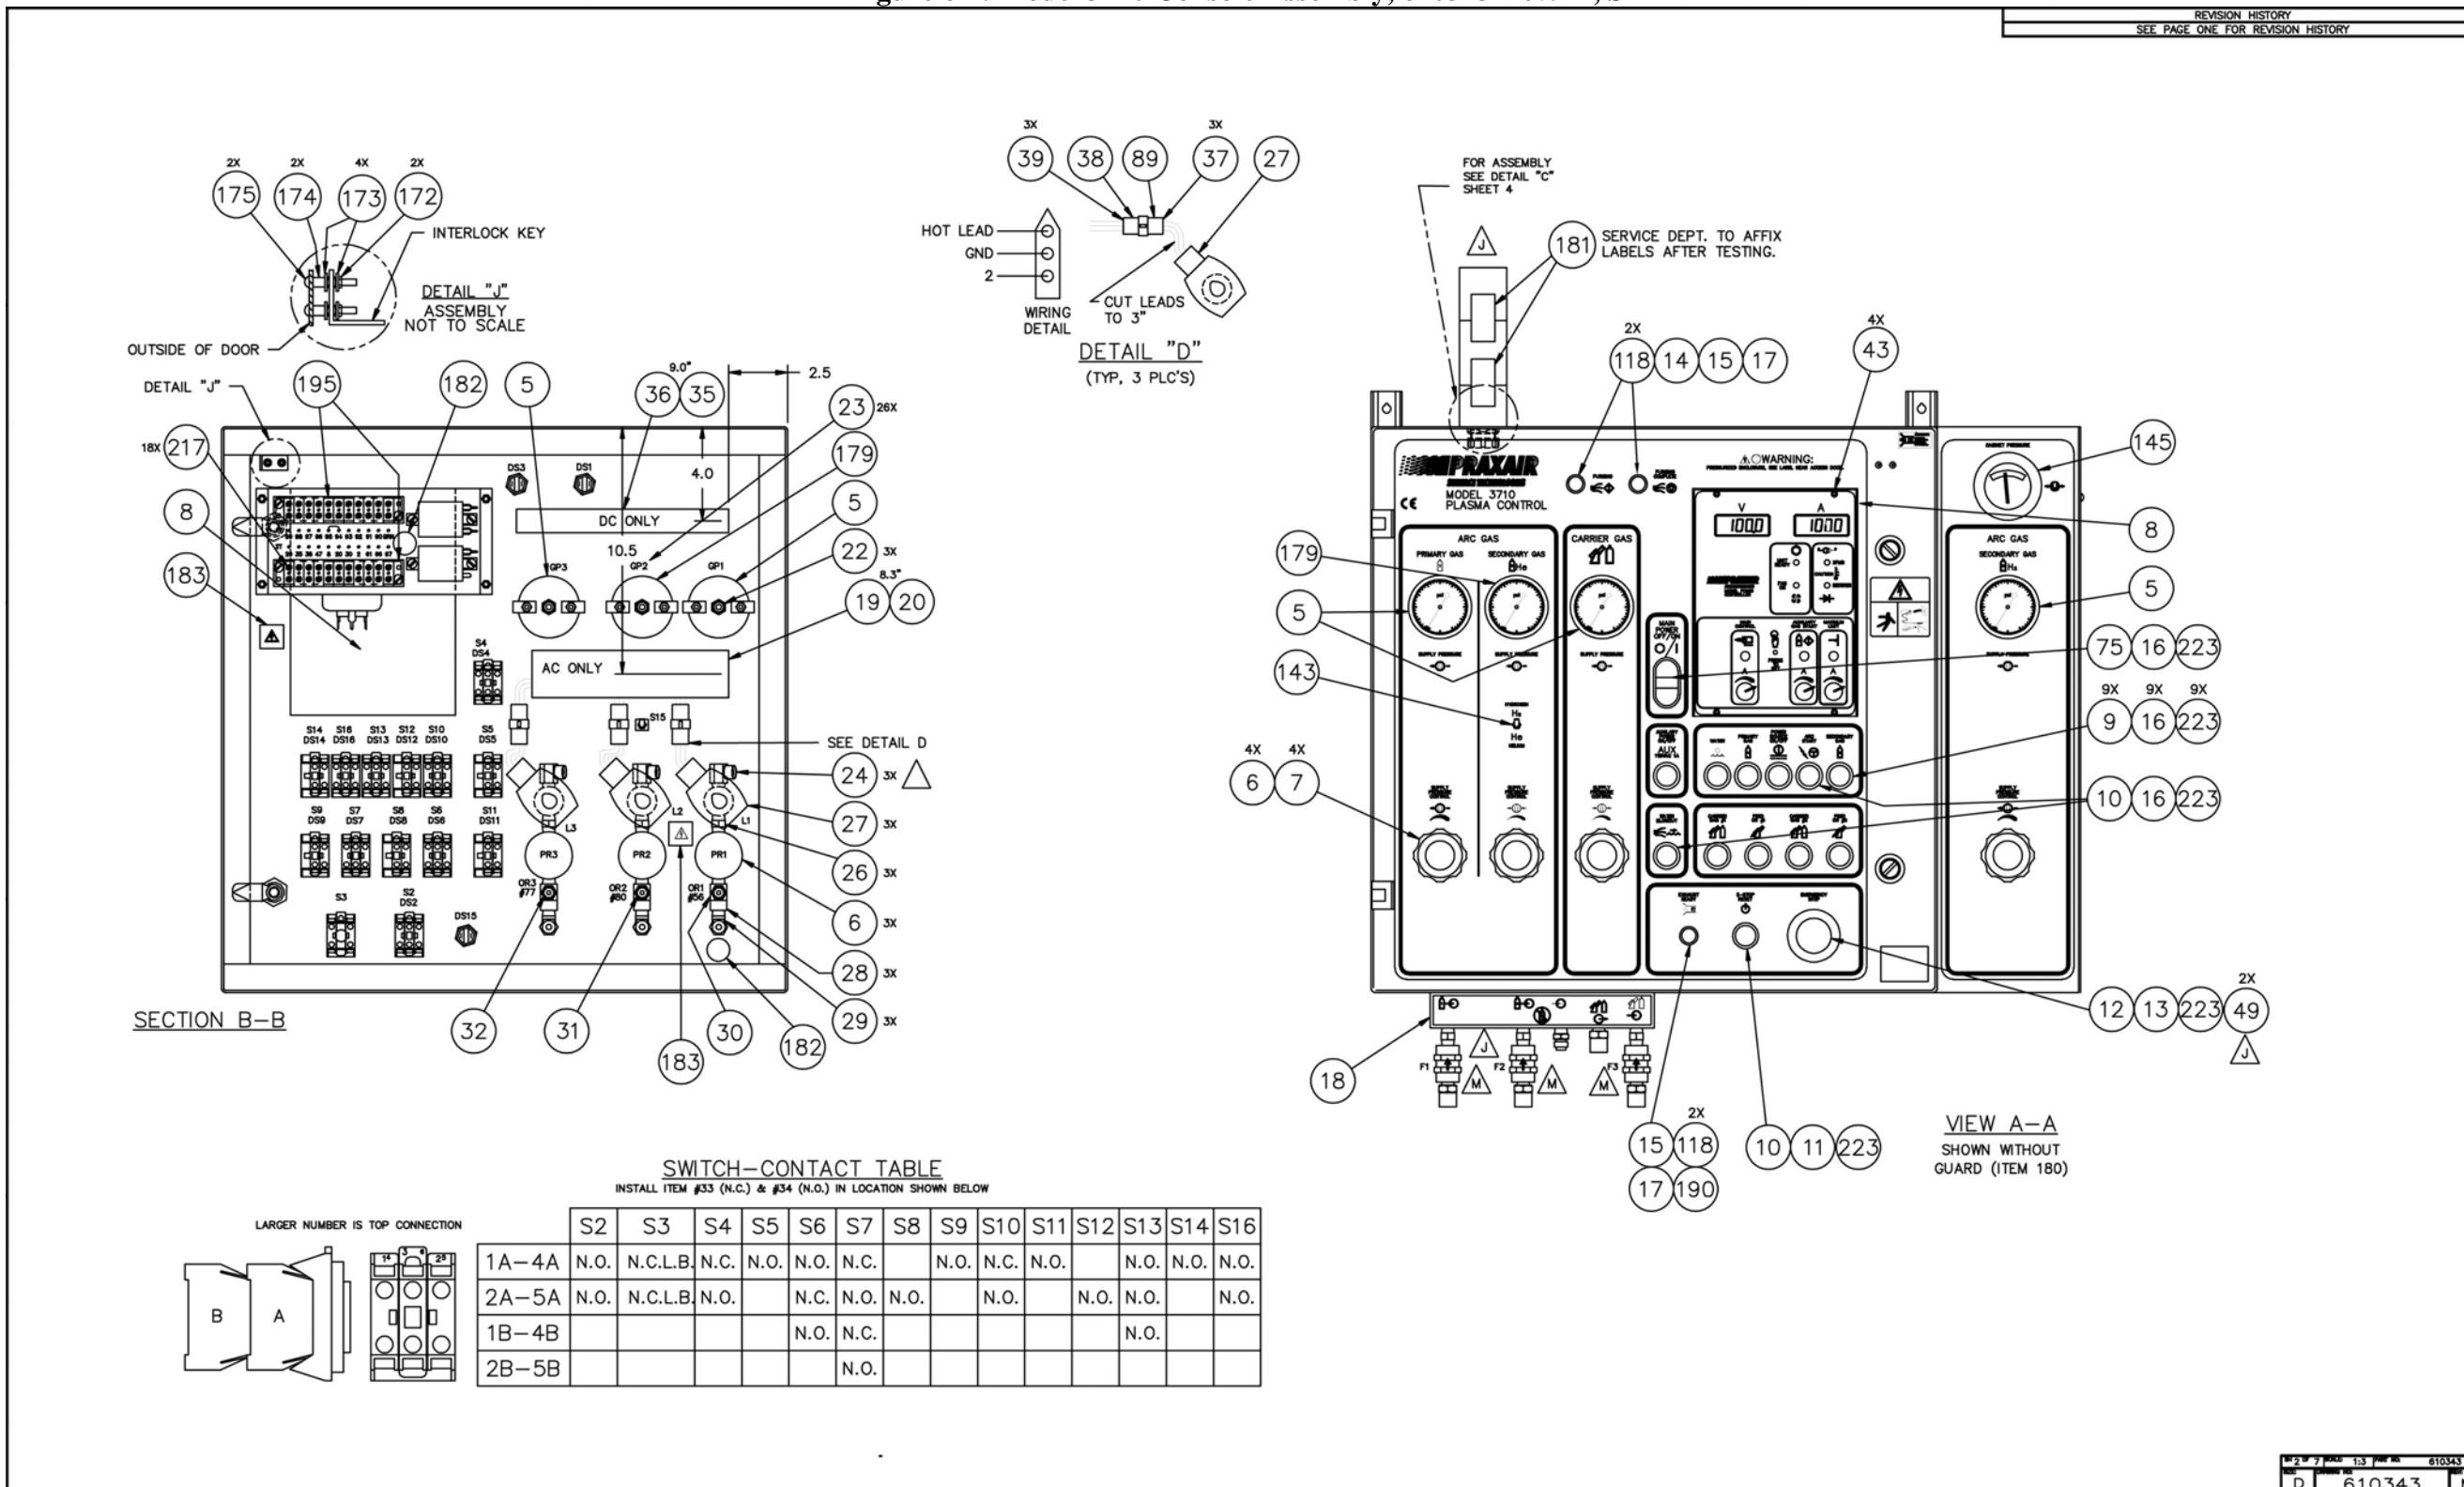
Model 3710 Console Assembly, 610343 Rev. M, S3
